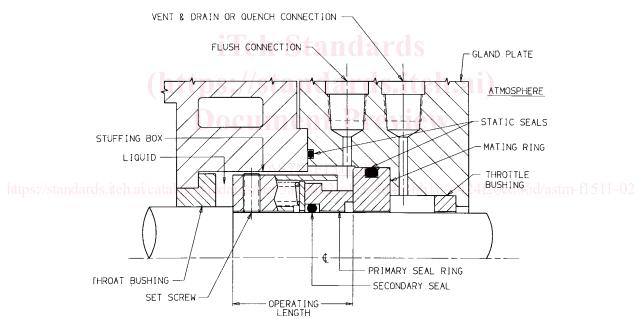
Single Seal—Inside Mounted Classification Type A Grade 1
